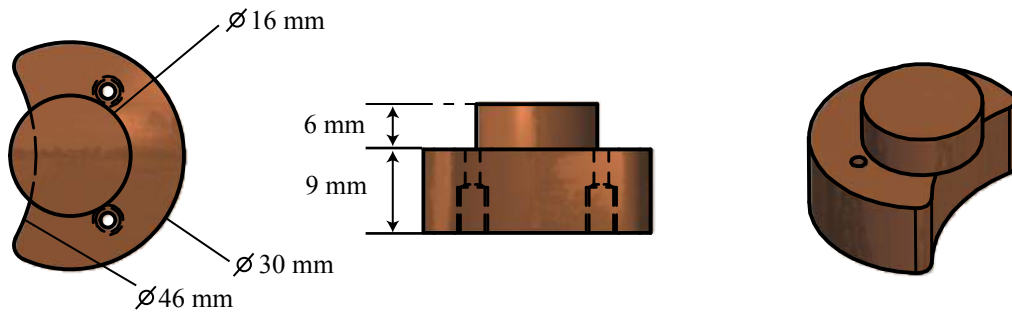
Diagrams illustrating the shape and dimensions of the coil former used for the second trap.
